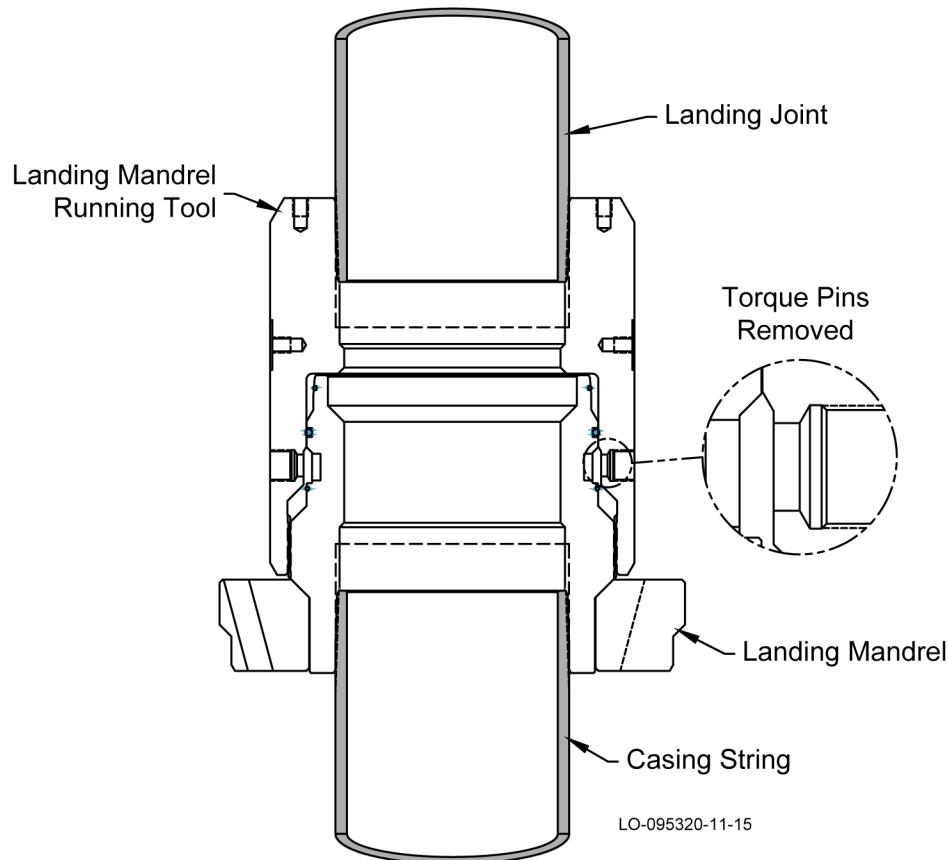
Landing Mandrel Running Tool/ Landing Mandrel Assembly Made-up to the Casing String
